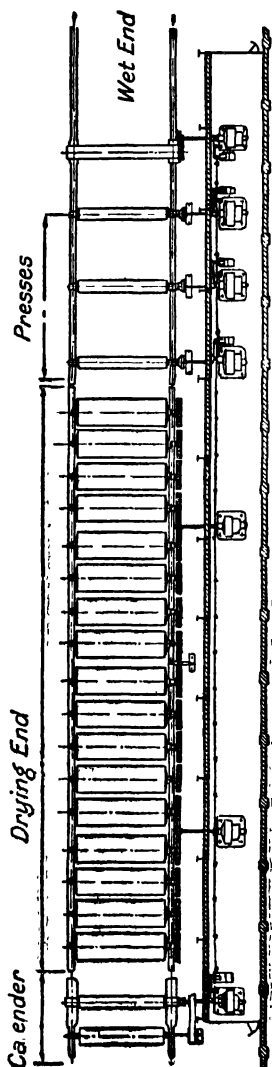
HARLAND DRIVE FOR PAPER-MAKING MACHINE
